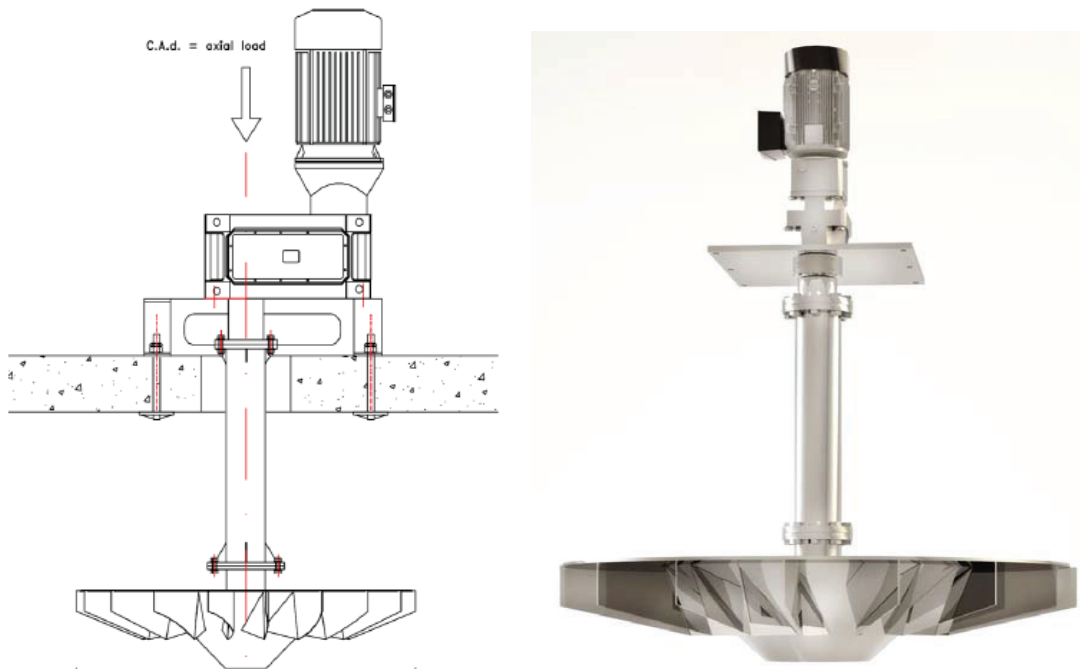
Rotox[®] Surface Aerator with top mounted drive
